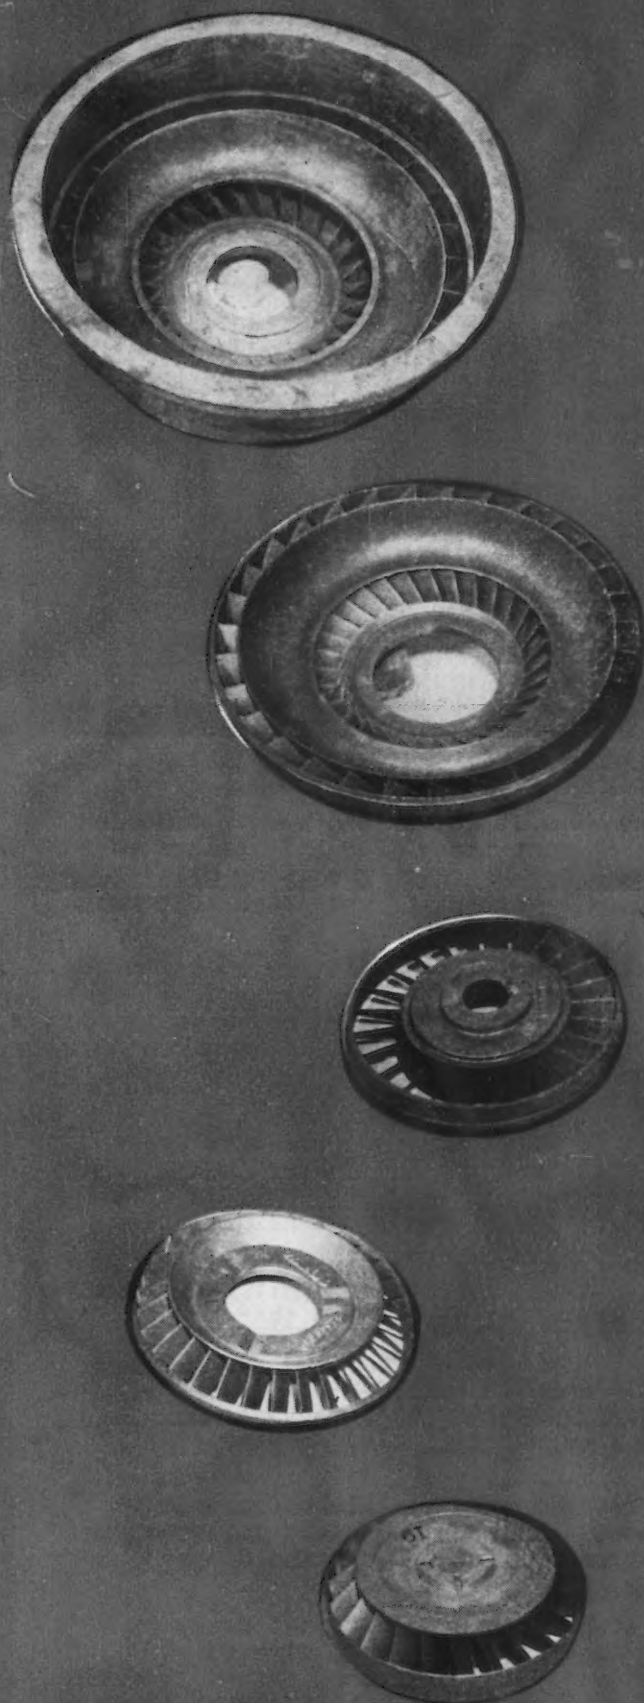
A set of five aluminum castings for the Buick torque converter, produced in the Allison-Bedford foundry by the Antilock pattern mold process. All blades are cast in. The rough weight of these five castings is 15 lb.
